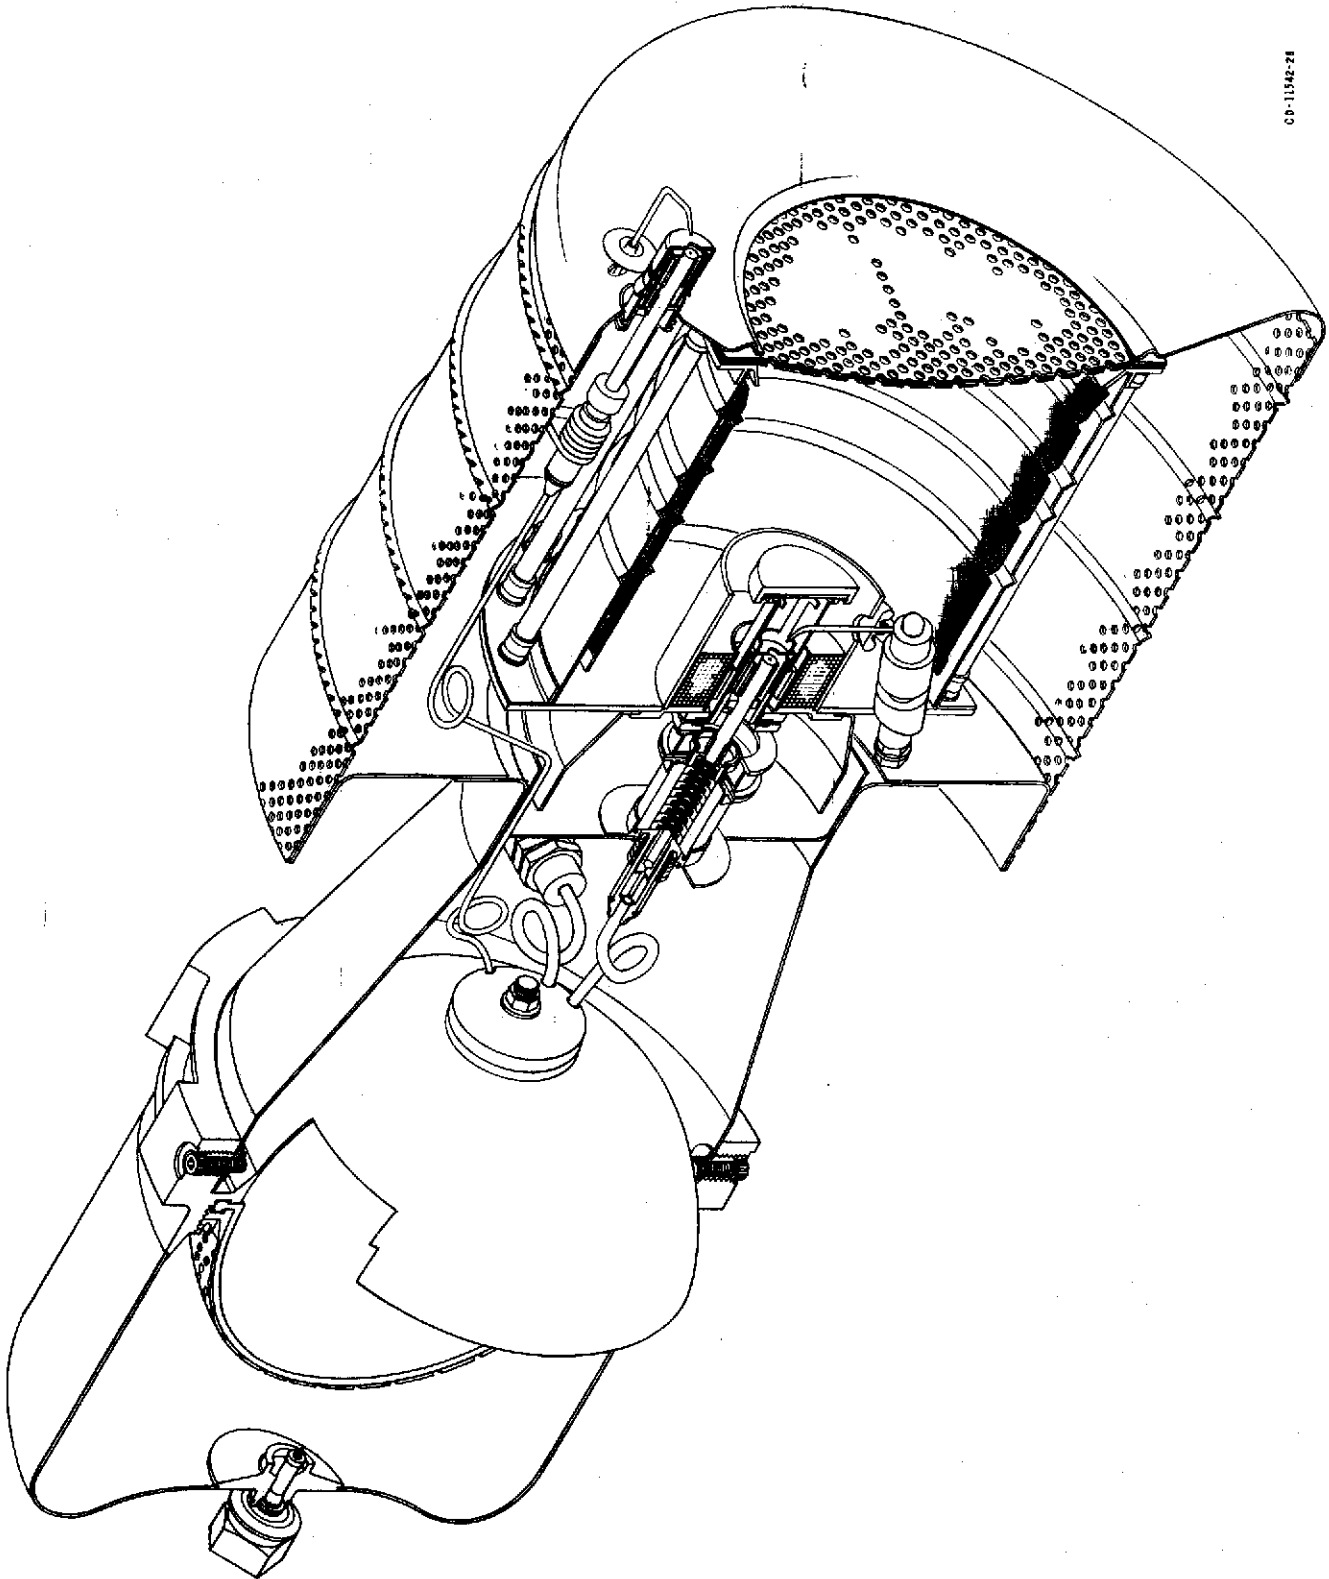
8-cm Ion Thruster Cutaway Drawing
